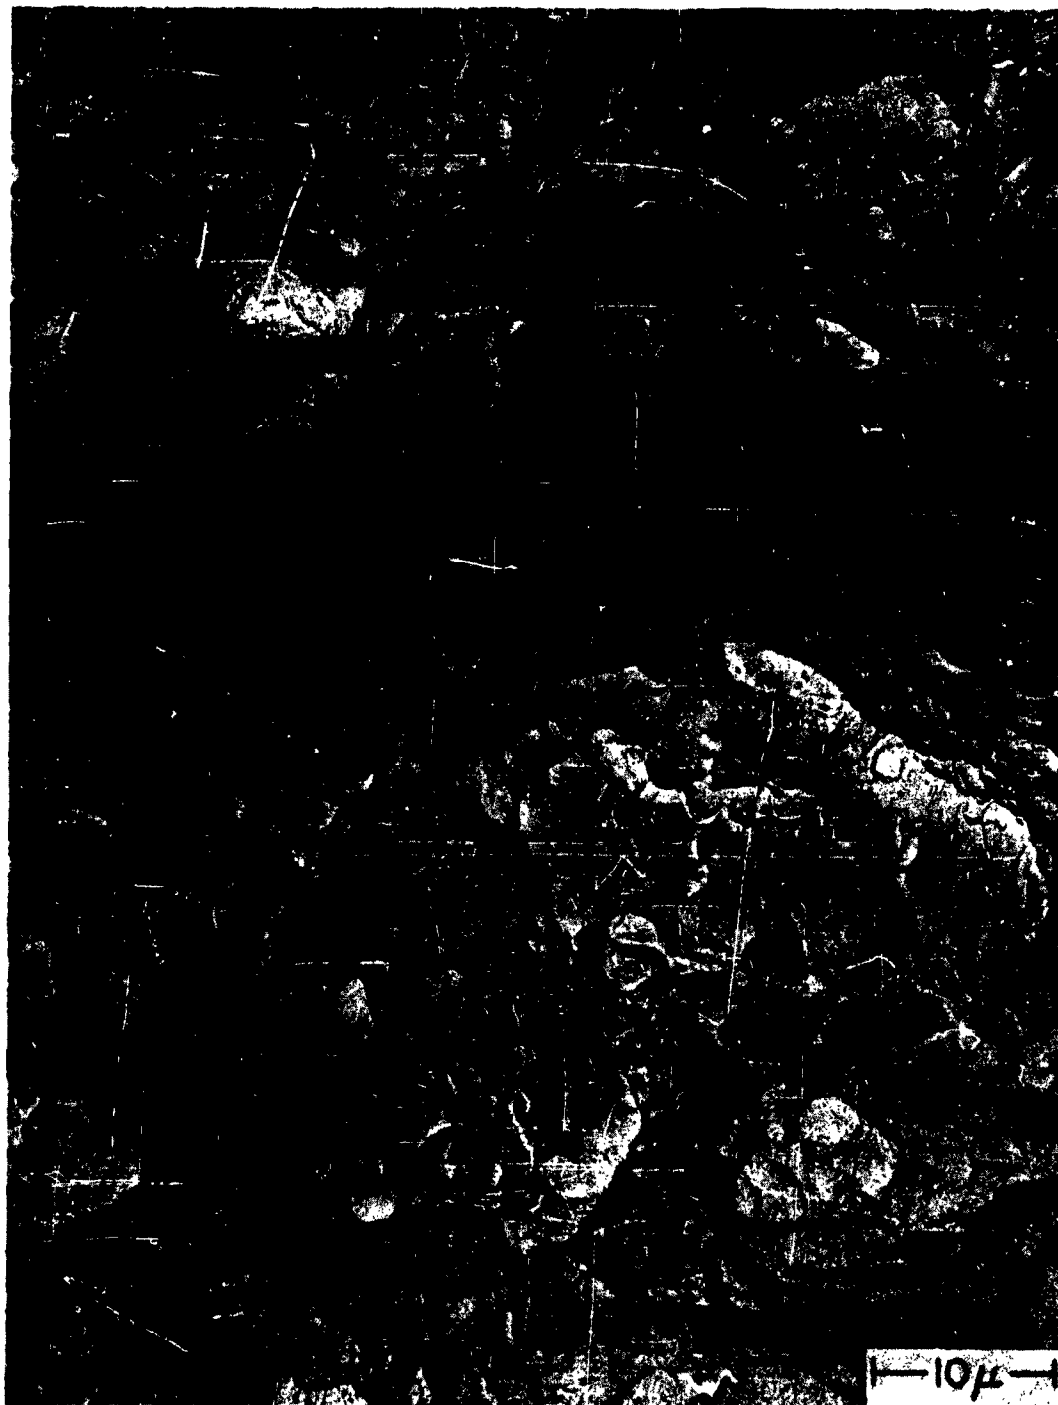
A. Fracture surface of 4338 steel (yield strength  $\approx$  223 KPSI). Dimpled rupture is the predominant fracture mode. 3030X.
